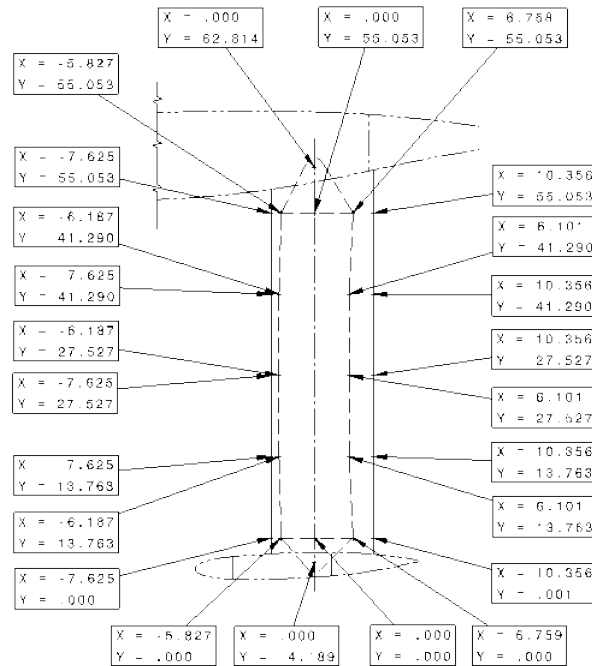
Jury strut corner point drawing (jury strut reference plane, units are inches).
